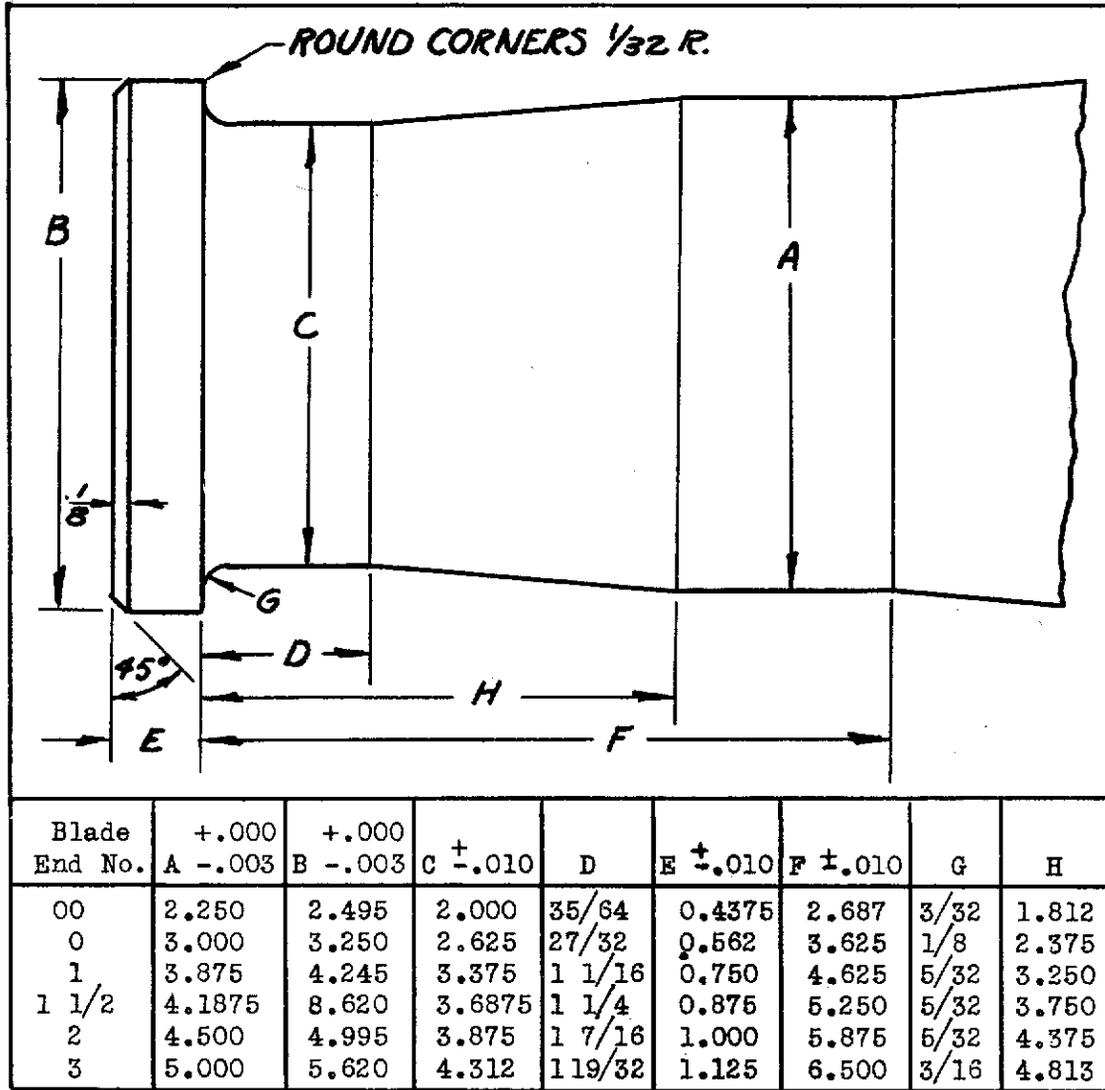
HOLLOW STEEL BLADE END DIMENSIONS.
